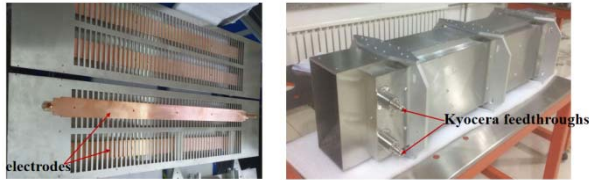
Photographs of a Falitin prototype structure, with eight Kyocera feedthroughs. (Left) Before assembly. (Right) After assembly.
